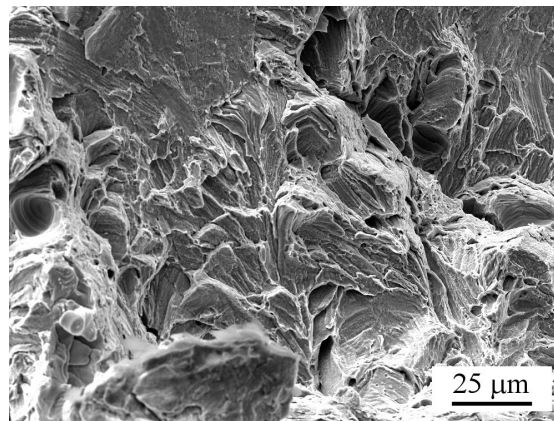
Detail „cleavage-like“ facets on the fracture surface of tensile specimens for LPBF variant tested at 550 °C.
